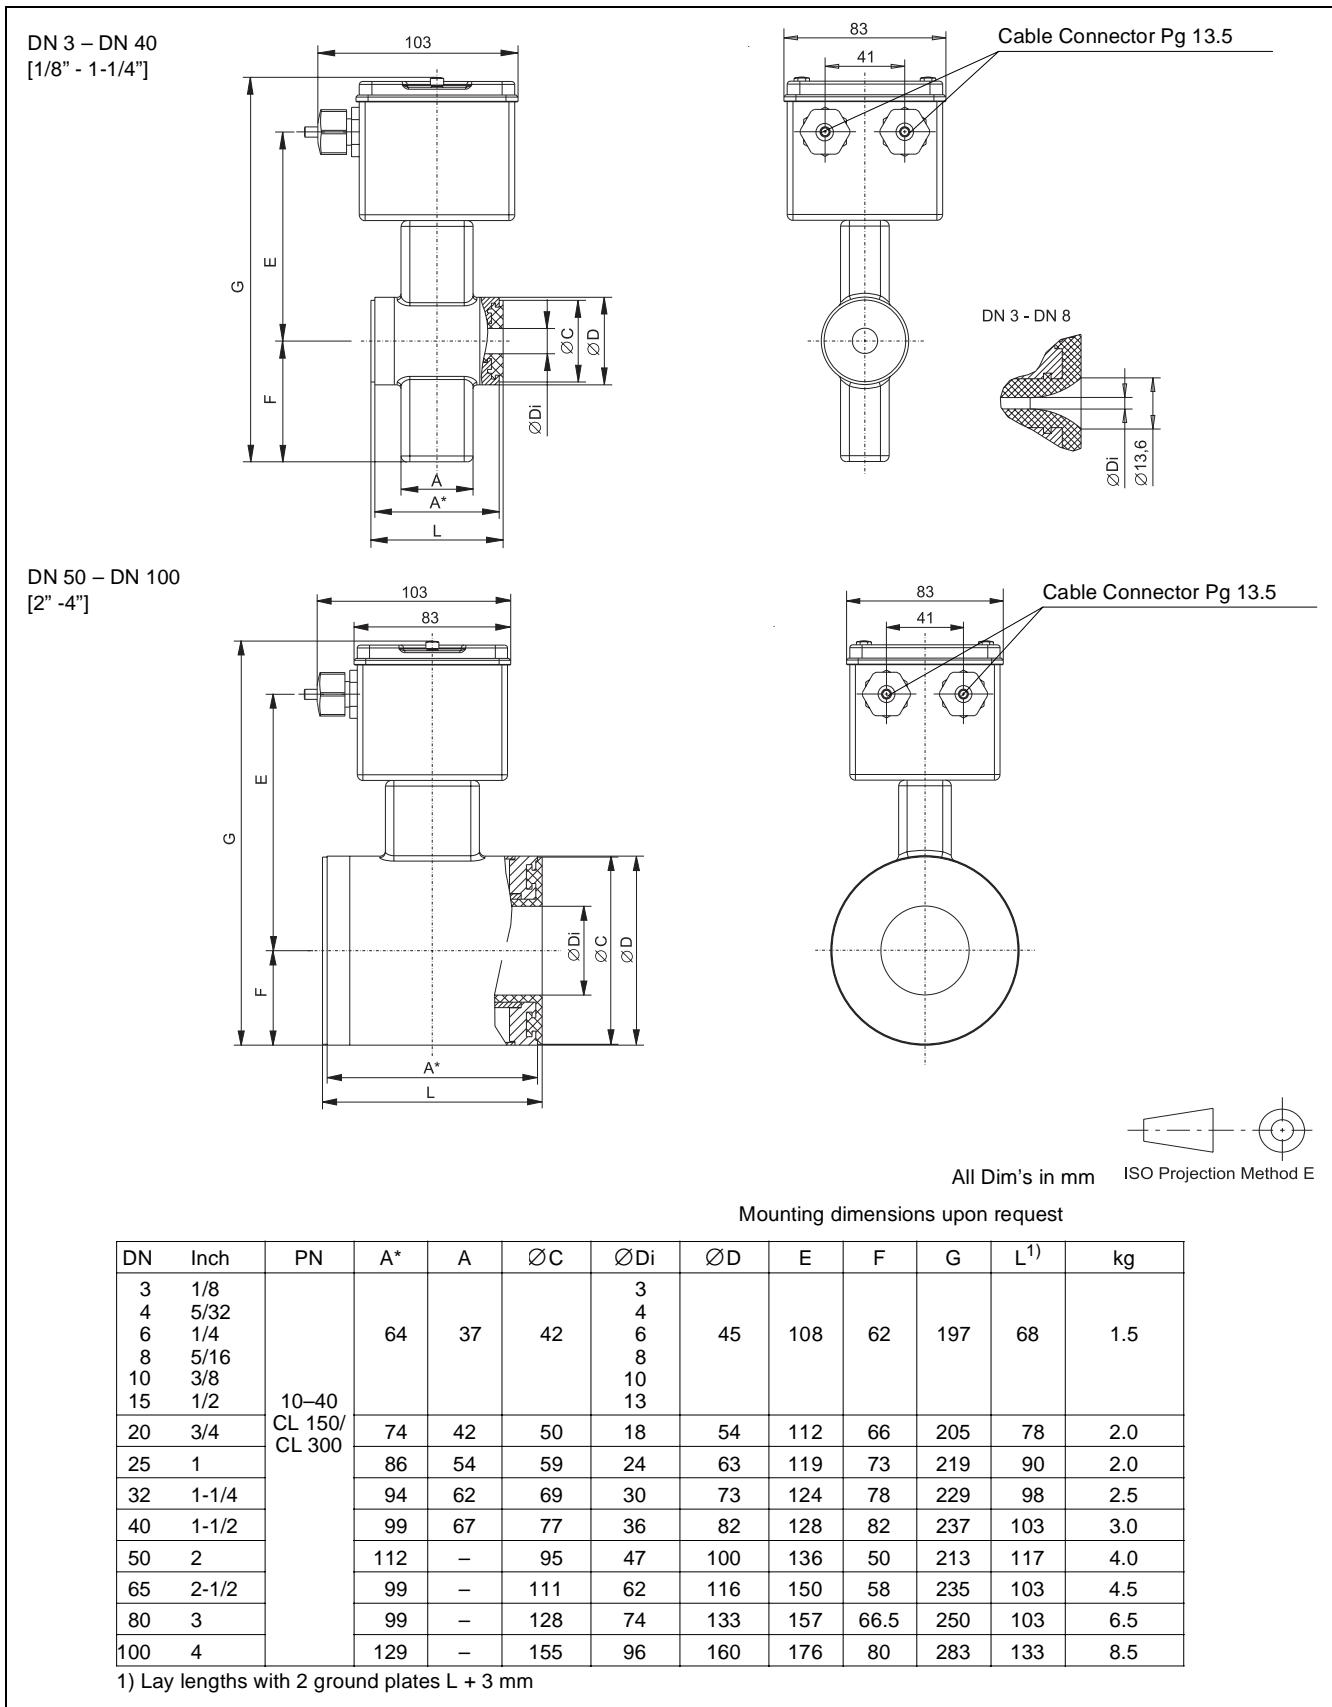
Dimensions, Model DS21W, DN 3 to DN 100 [1/8" to 4"], Wafer Design
